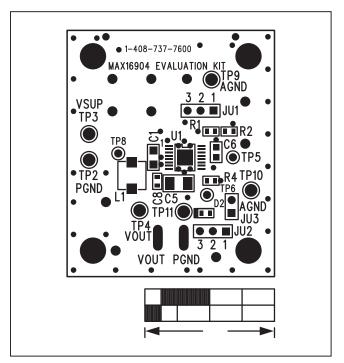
MAX16904 EV Kit Component Placement Guide—Component Side
